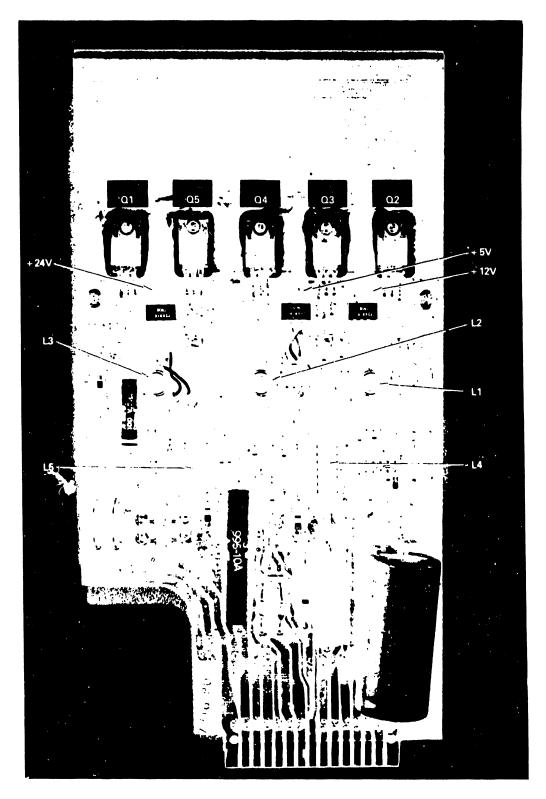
MASTER (5505-1) — POWER REGULATOR PCB
